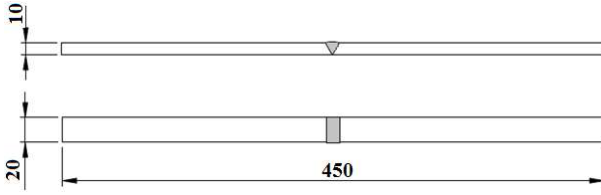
Fatigue and bending test sample (dimensions are in mm)
